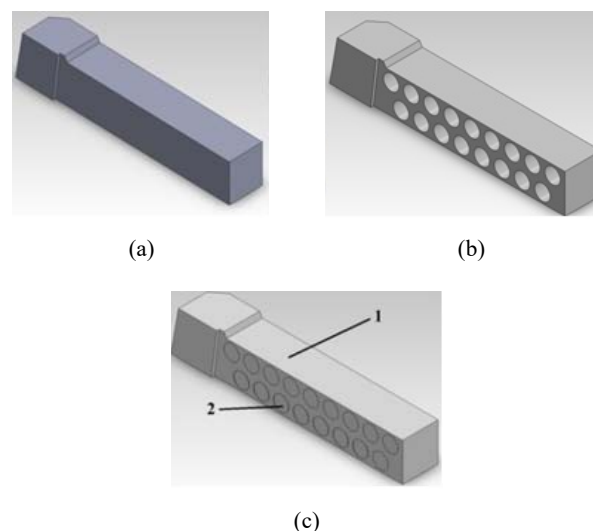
3D- model of cutting tools in SolidWorks: (a) conventional cutting tool; (b) cutting tool with horizontal holes arranged in a chess-board pattern (\varnothing 7 mm) and (c) cutting tool filled up with epoxy granite: 1 — toolholder and 2 — epoxy granite
